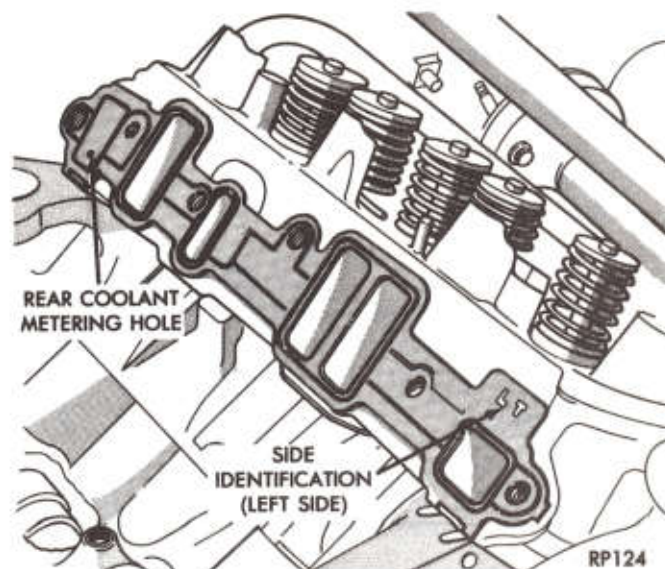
Intake Manifold Side Gaskets—Left Side Shown
